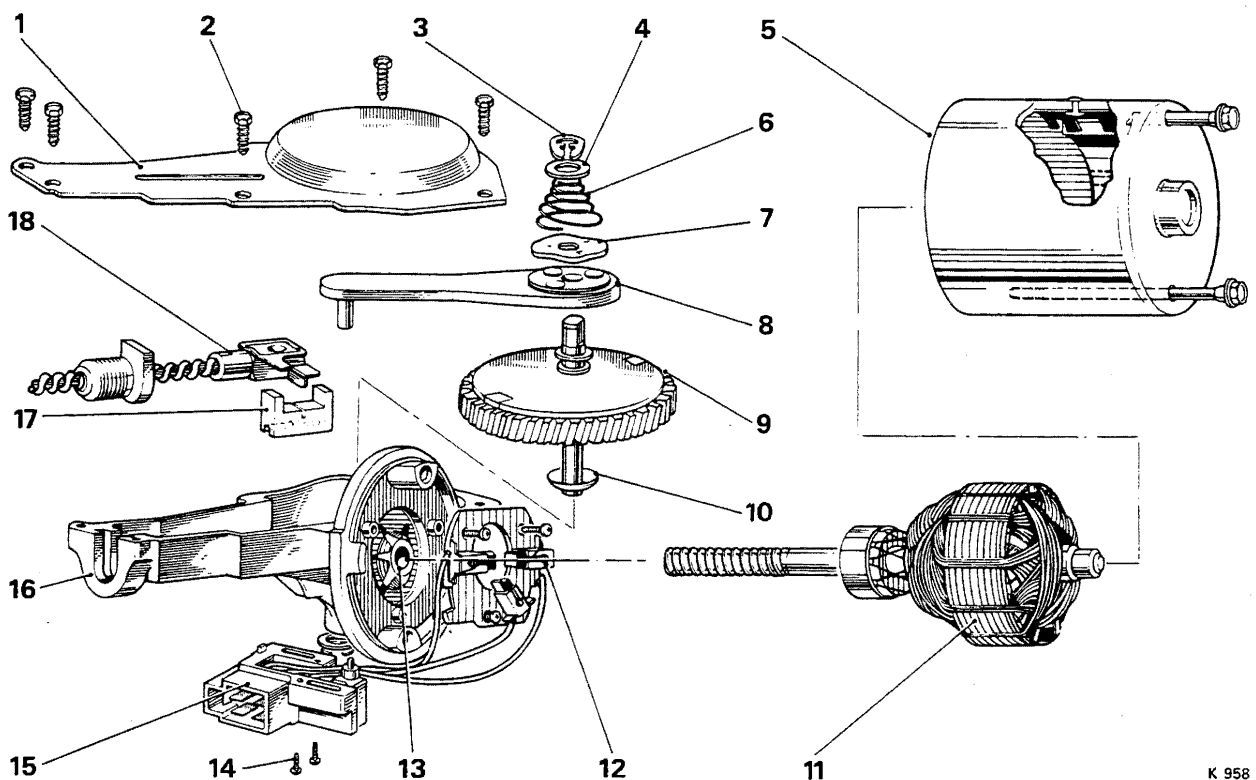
EXPLODED VIEW OF 'LUCAS' 16 W WIPER MOTOR
